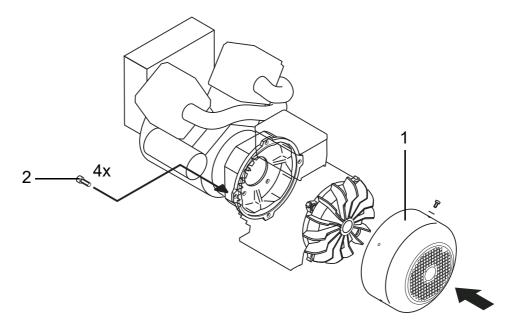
Assembly of brushless single-bearing generators with tension bolts (2)
